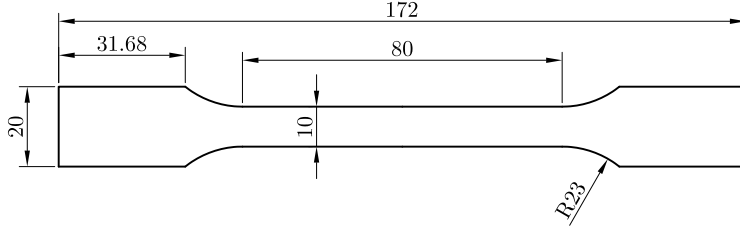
Dimensions of the GFRP plane tensile specimens, in millimeters.
